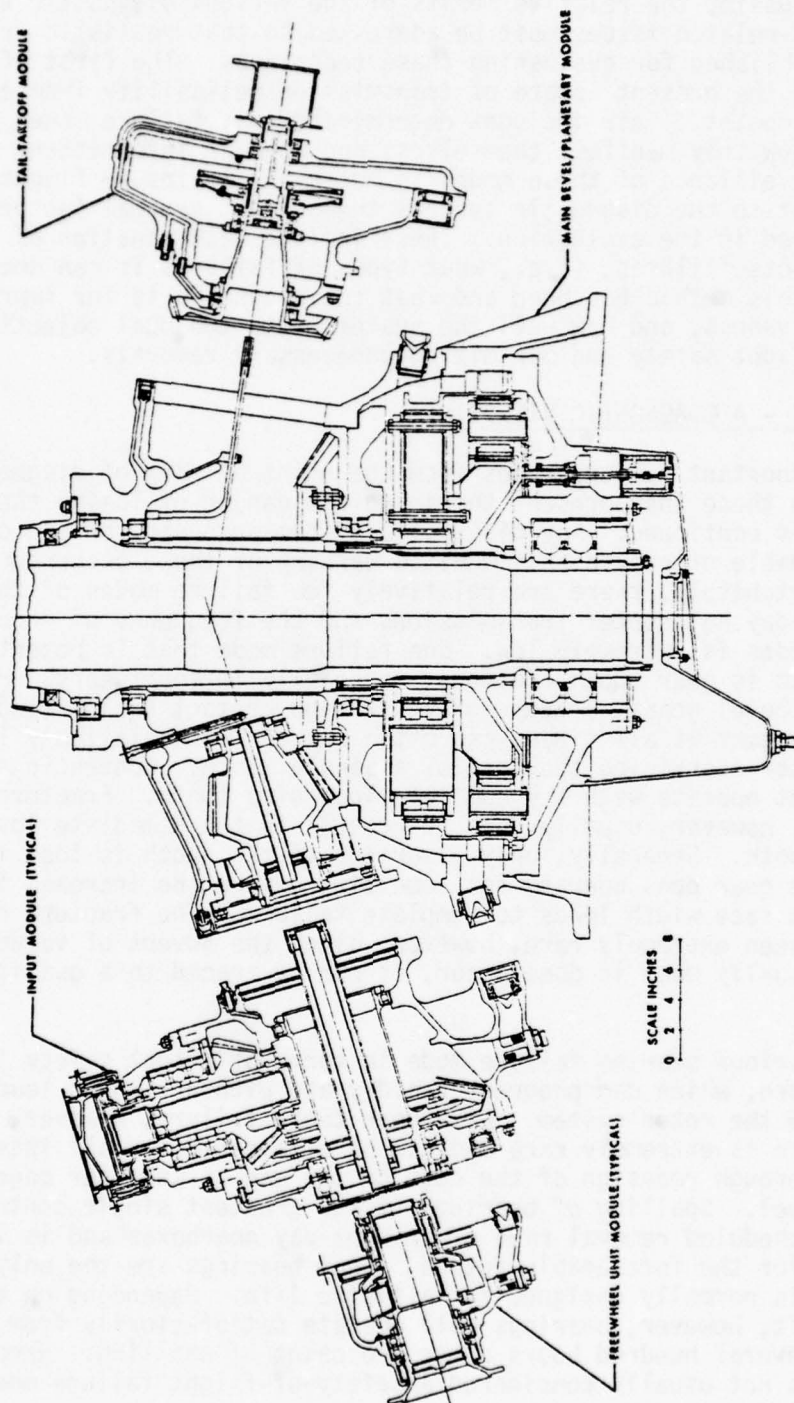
CH-54 Modularized Main Gearbox Cross Section.
